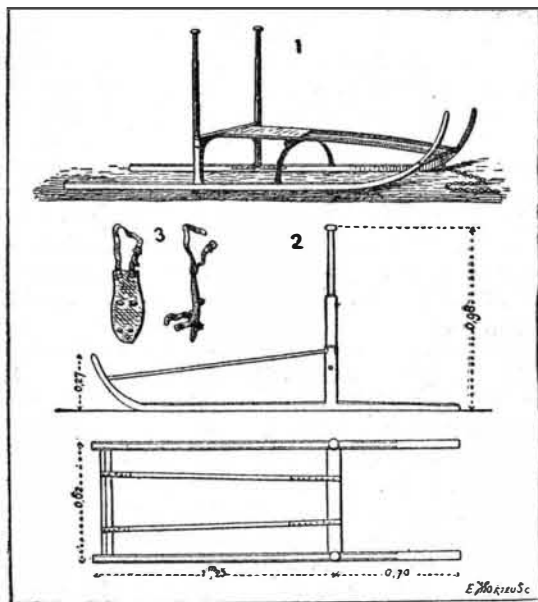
THE SPARKSTOTTING OF SWEDEN.
